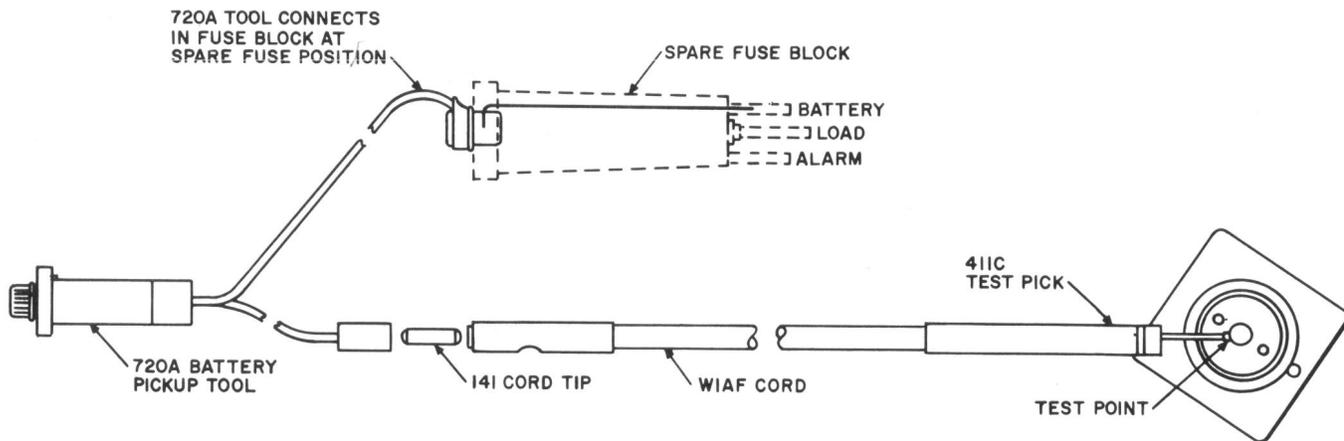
Fuse Alarm Testing Cord—Tool Connection
